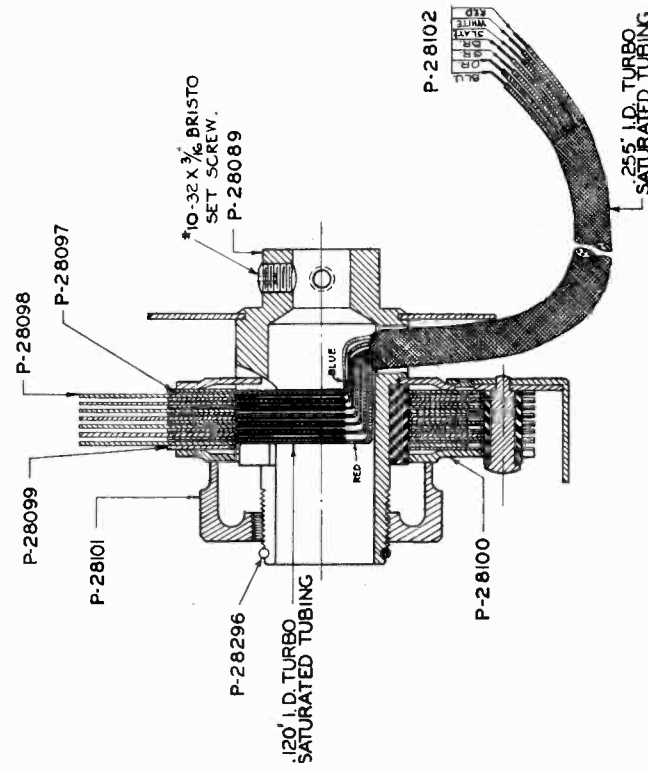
Section View of Flash Tuner Contactors Assembly.
